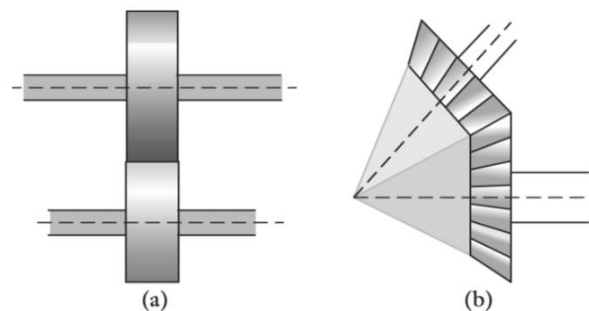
(a) Parallel gear axes, (b) axes inclined to one another
